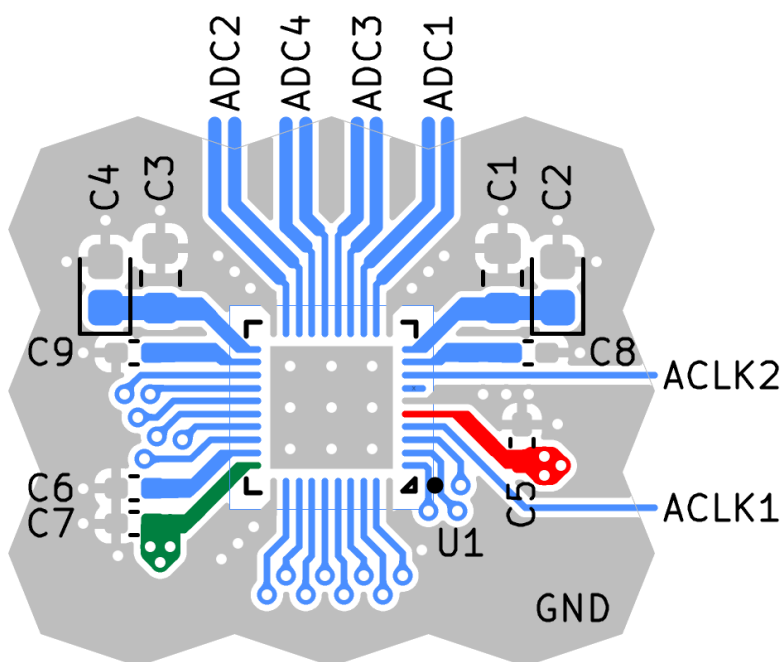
ES9841 Recommended PCB Layout Guidelines
